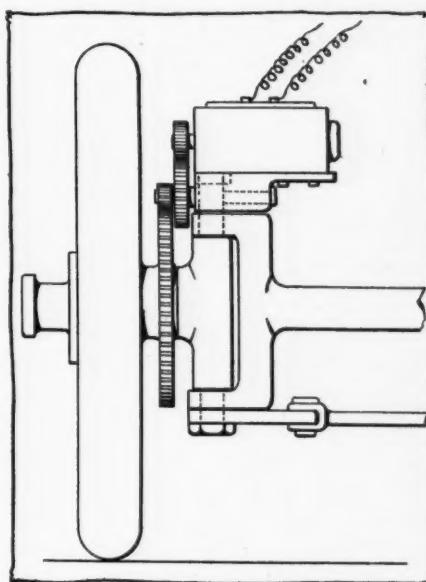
DIAGRAMMATIC METHOD OF MOUNTING A MOTOR
